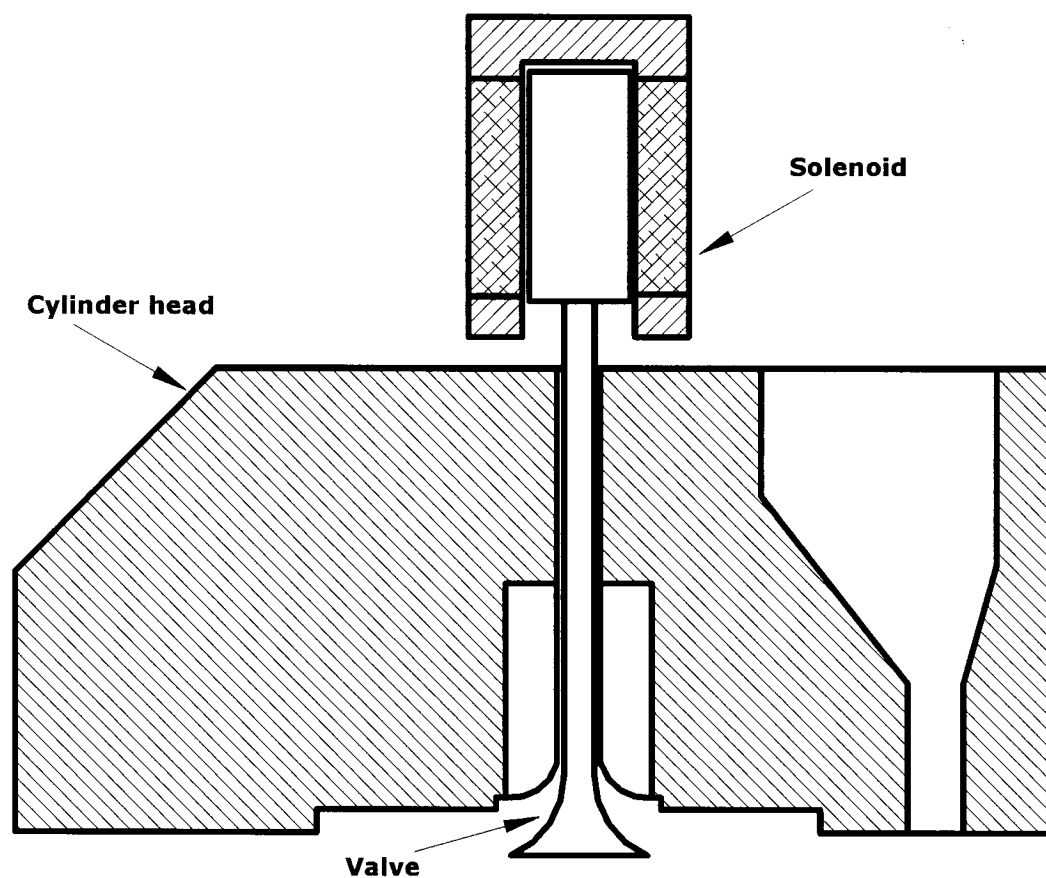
Overhead mounted solenoid operated valve mechanism
